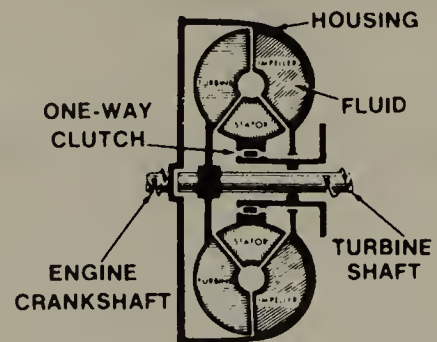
The torque converter housing is rotated by the engine's crankshaft, and turns the impeller—The impeller then spins the turbine, which gives motion to the turbine shaft, driving the gears
